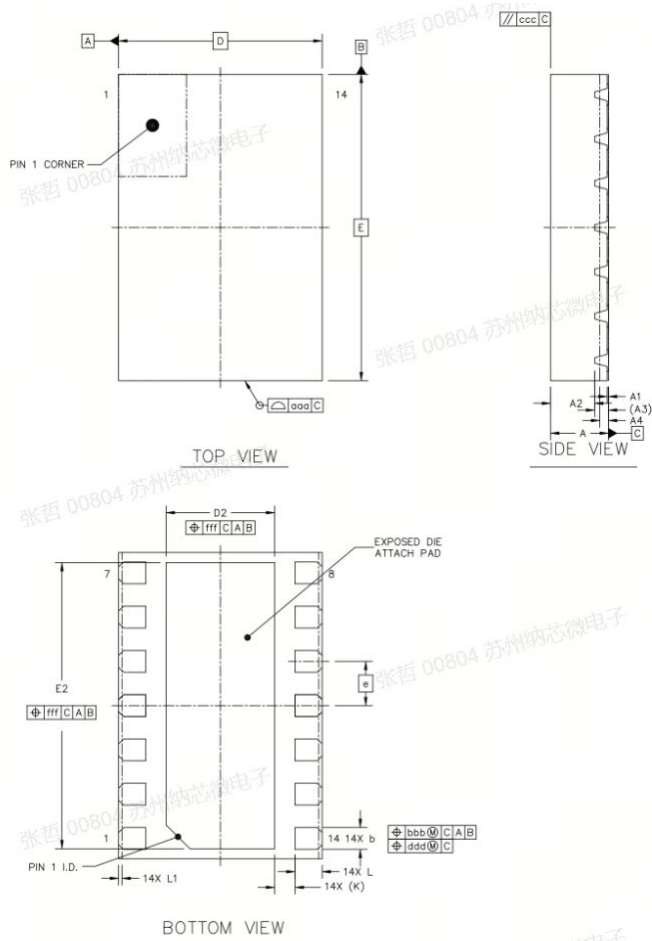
SOP14 Package Shape and Dimension in millimeters
